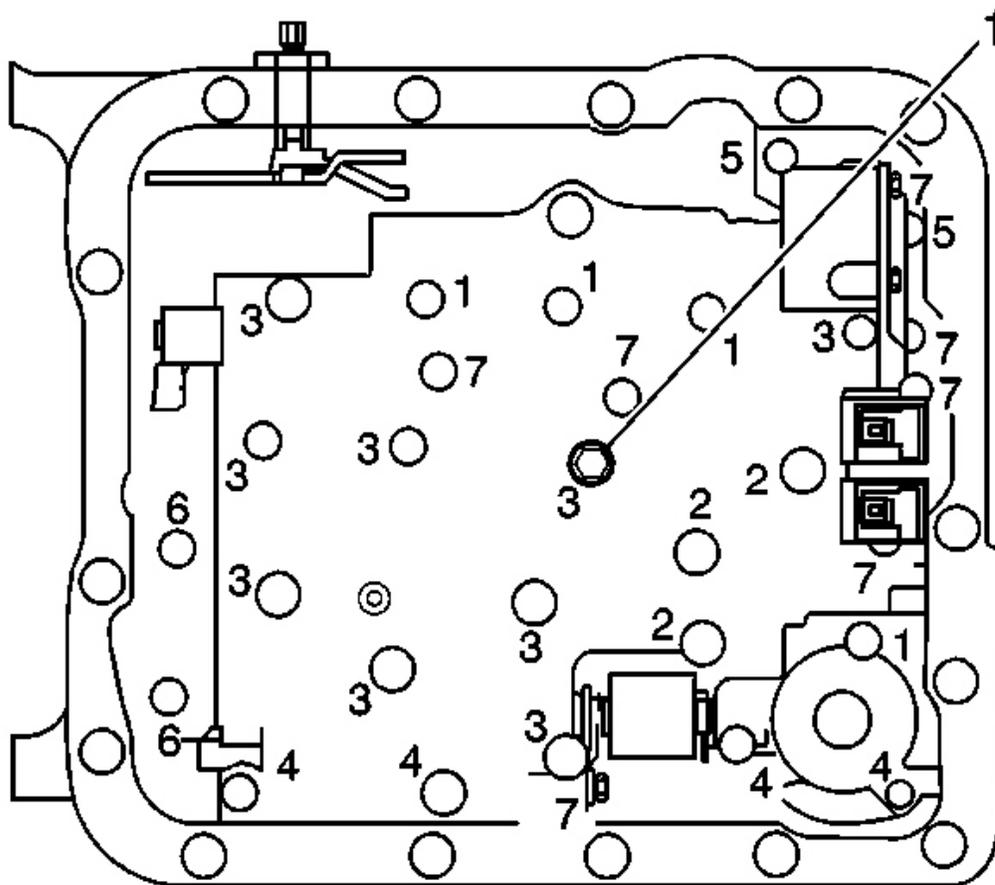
Installing One Bolt Hand Tight In Center Of Valve Body
